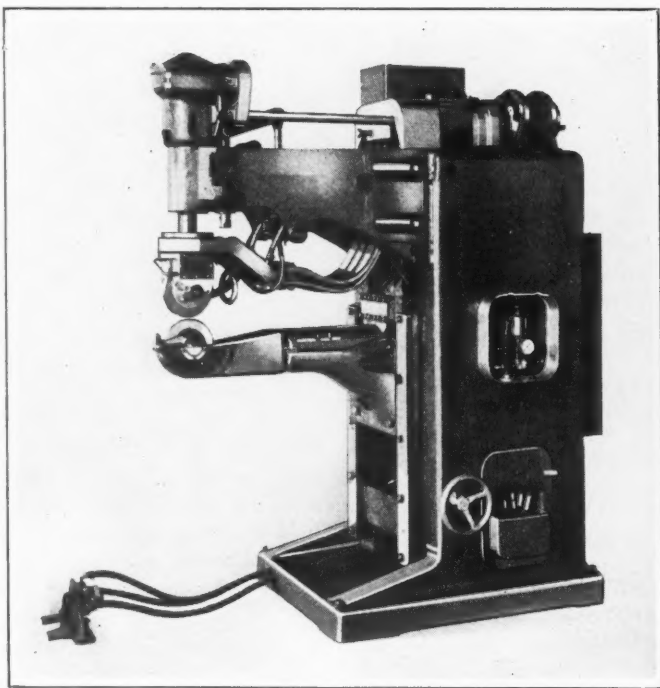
Thomson-Gibb Seam Welding Machine of Improved Design
